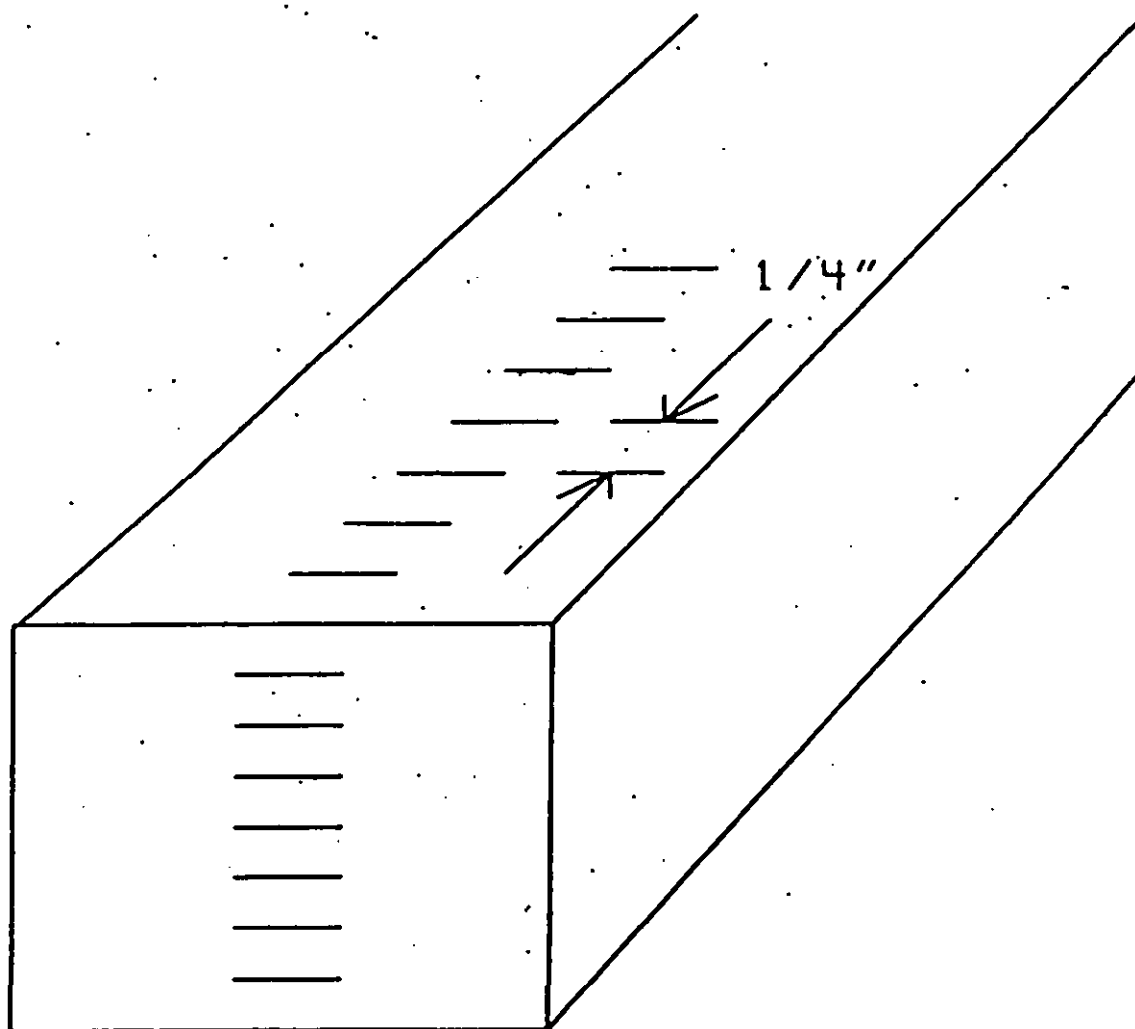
Index marking layout for shear wave pitch-catch end scan of large bar, rod and forgings.
